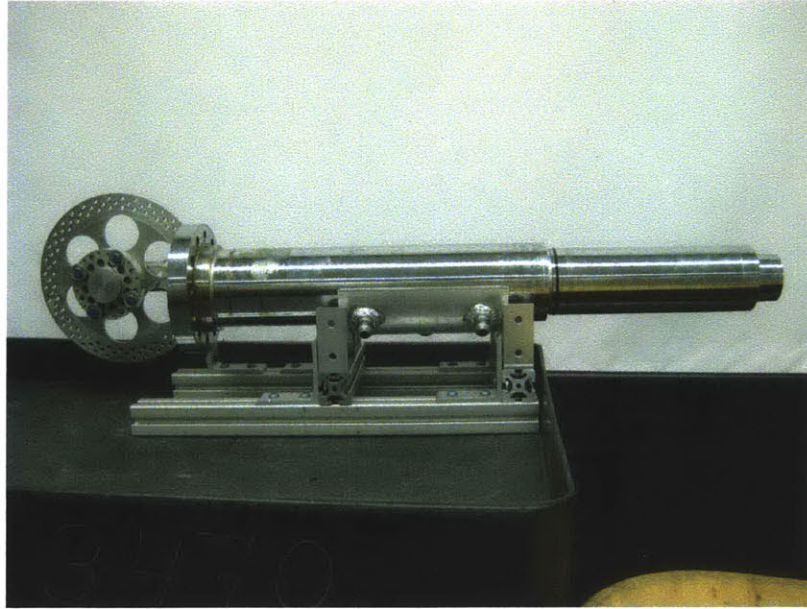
Setup for proof of concept half bearing (hoses removed for clarity)
